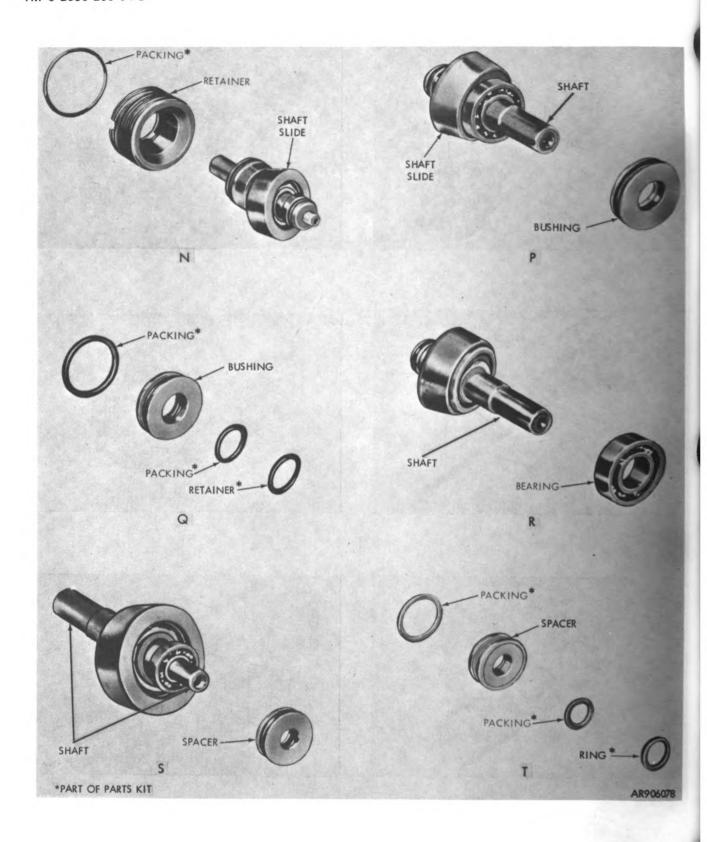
Manual elevation pump disassembly or assembly (3 of 4)
